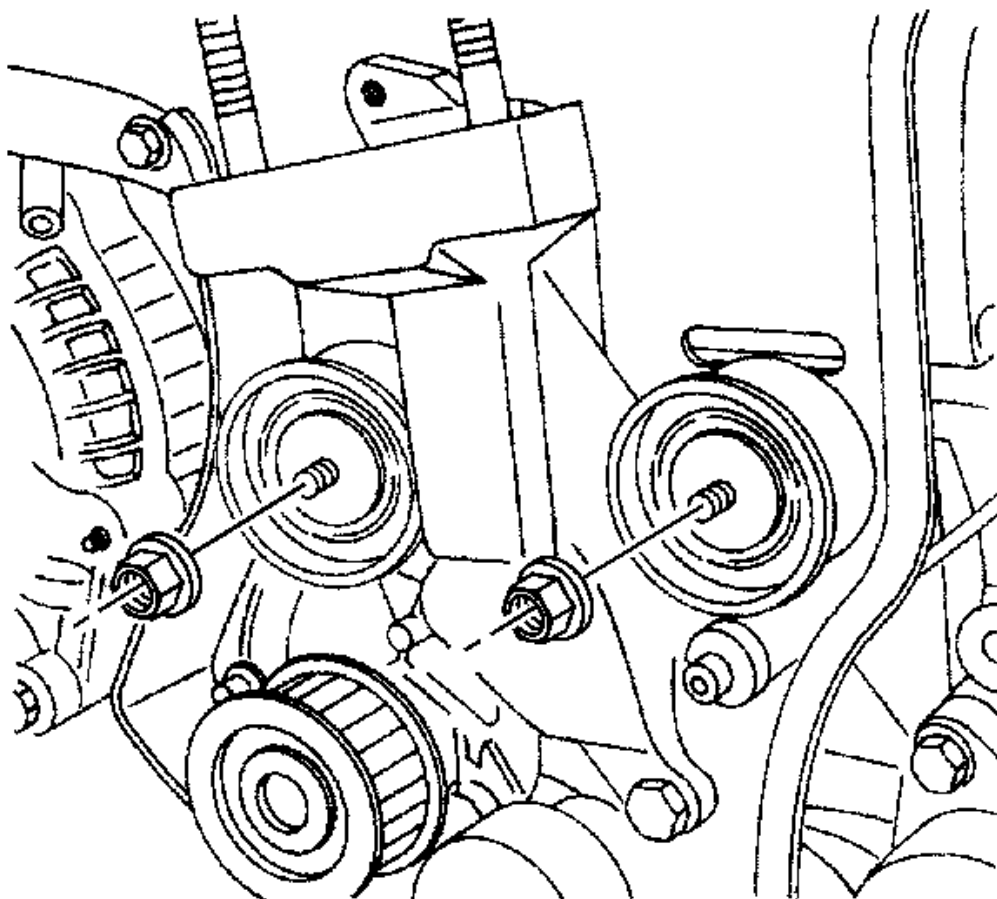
View Of Timing Belt Idler Pulleys And Retaining Bolts
